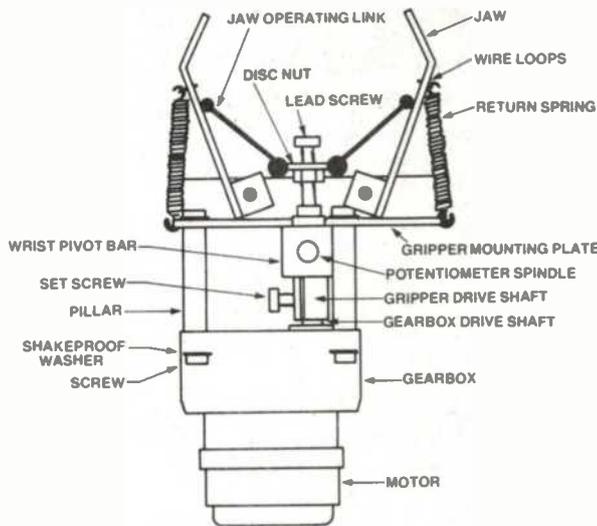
The gripper assembly showing motor mounting, jaw components and pivot bar, etc.
